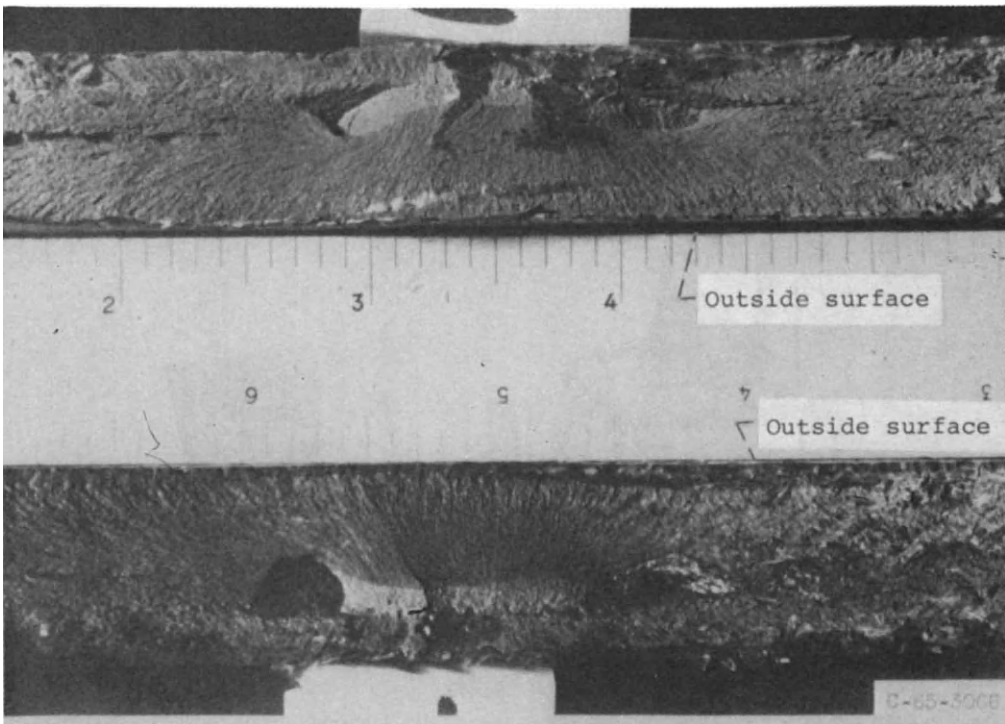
Mating surfaces near the fracture origin on W7/302 weld.
